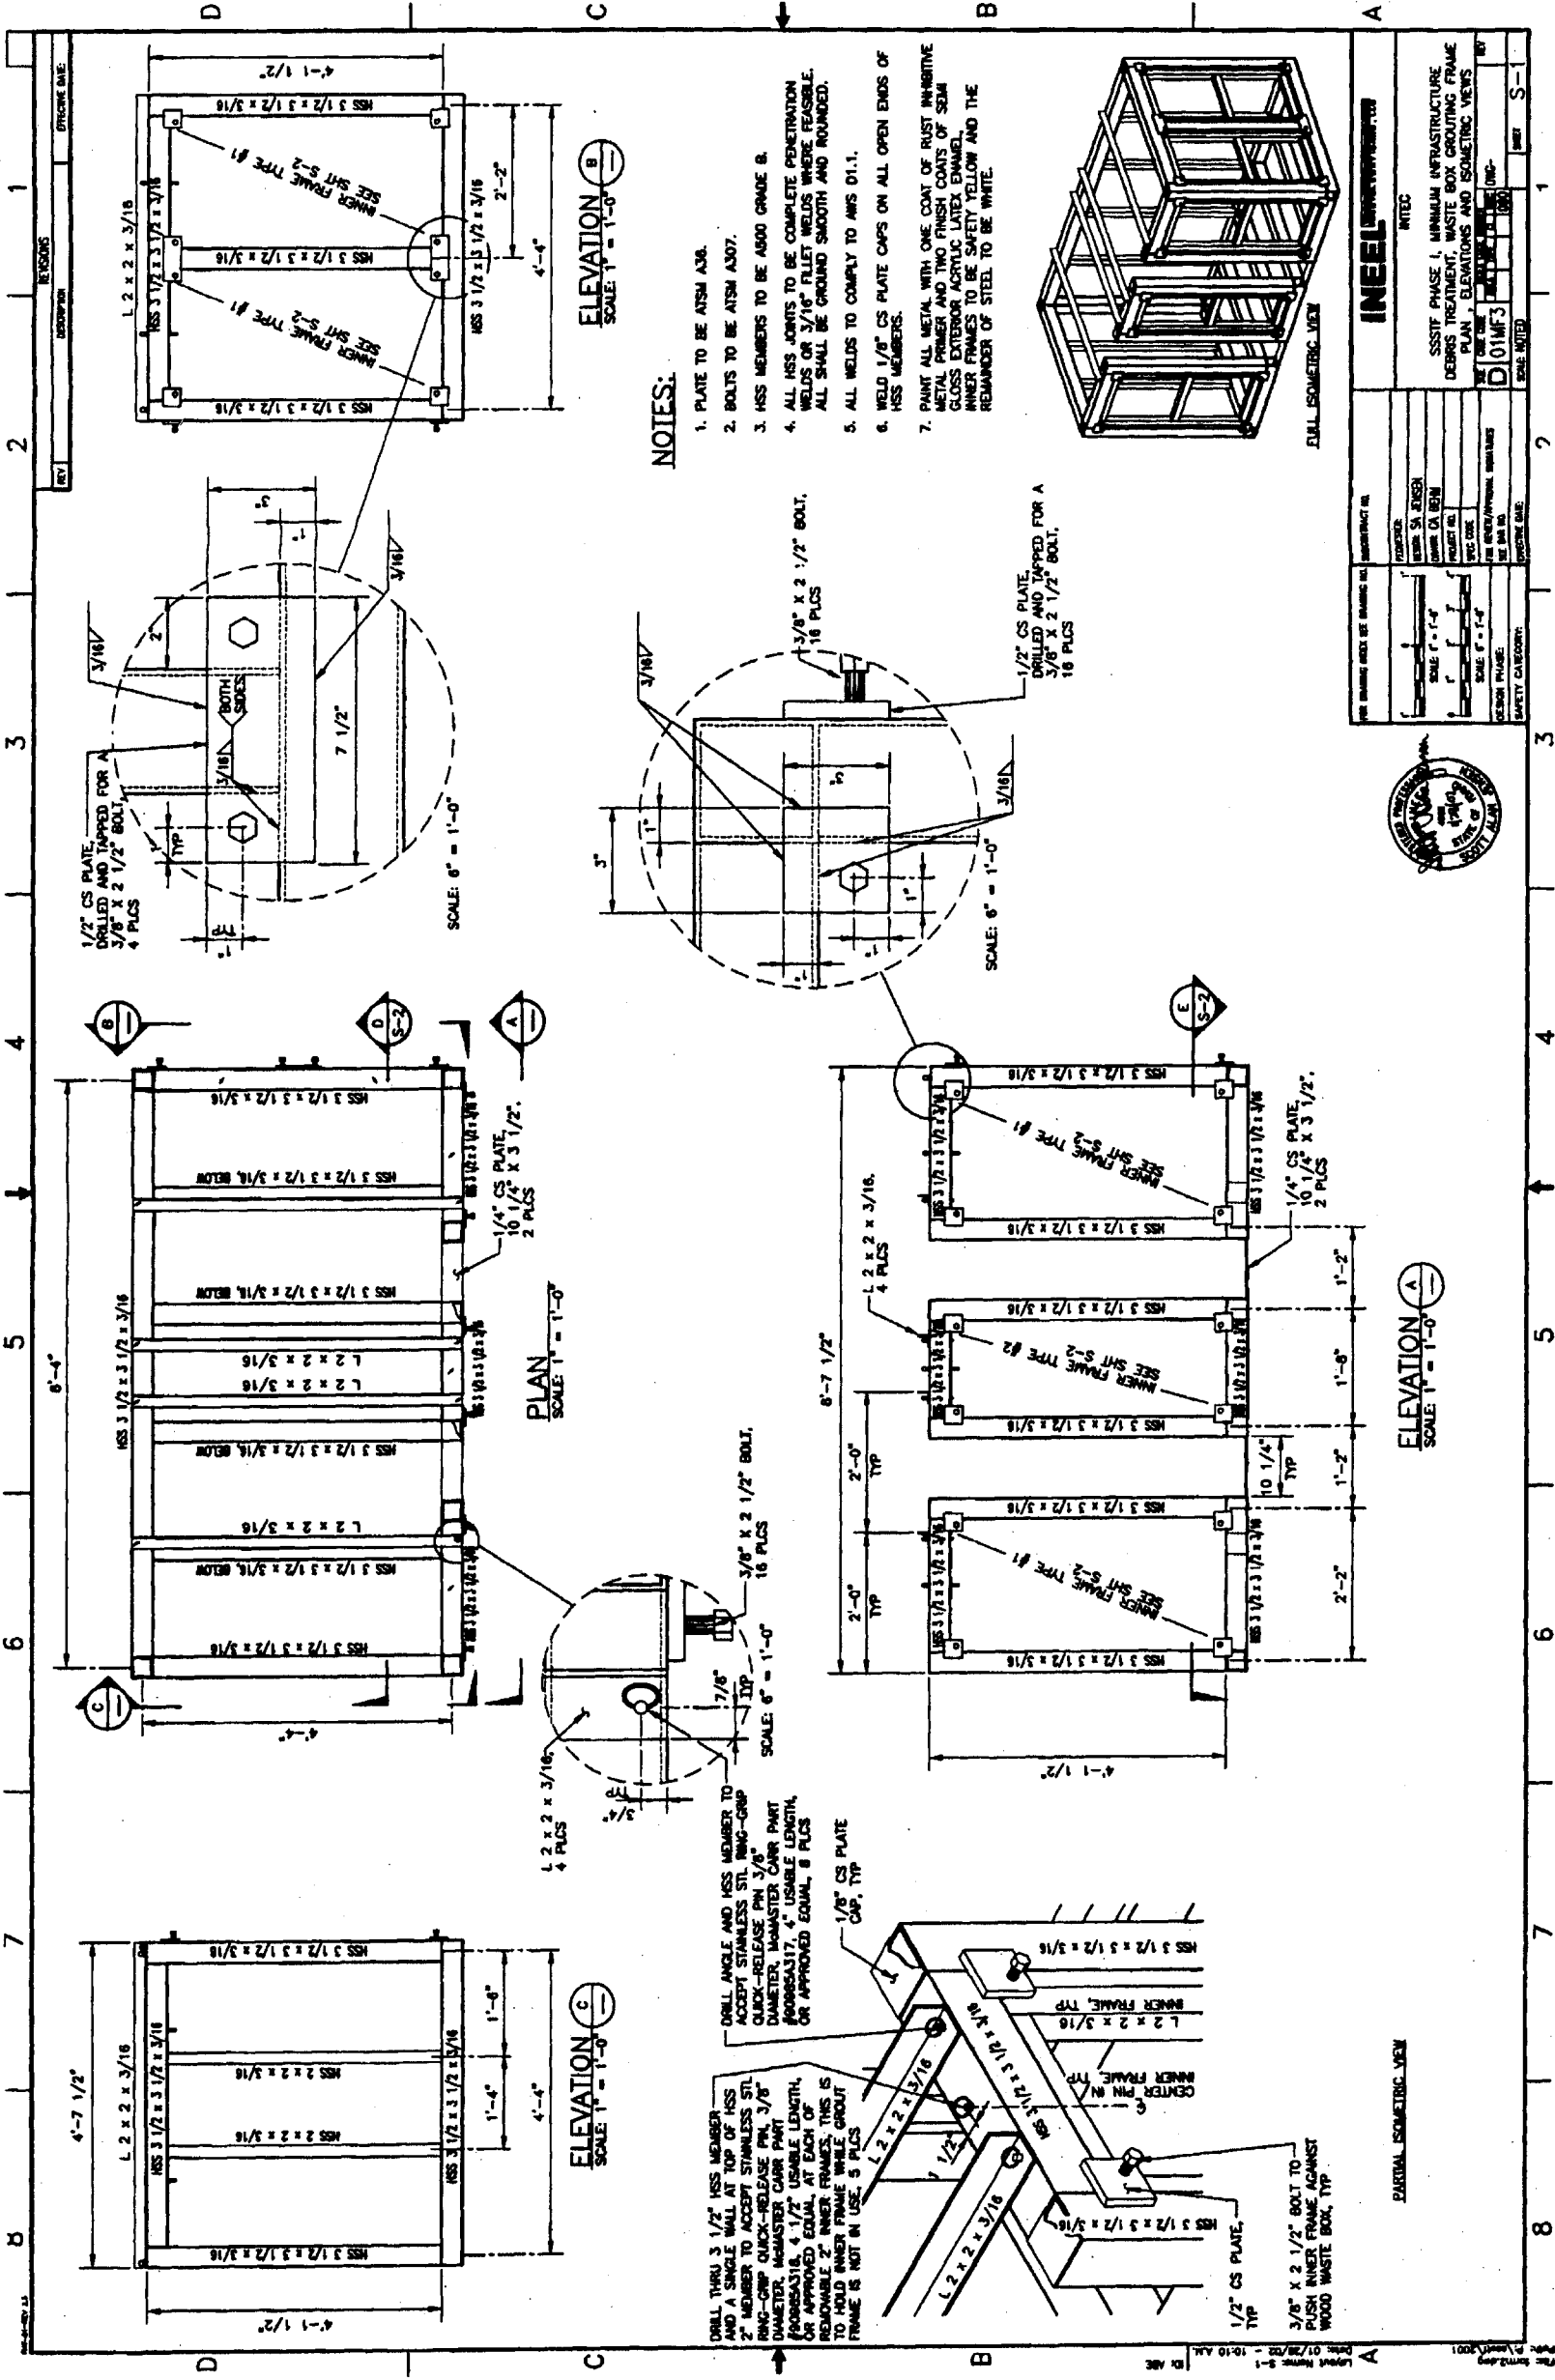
SSSTF debris treatment waste box grouting frame, sections and schedule.
